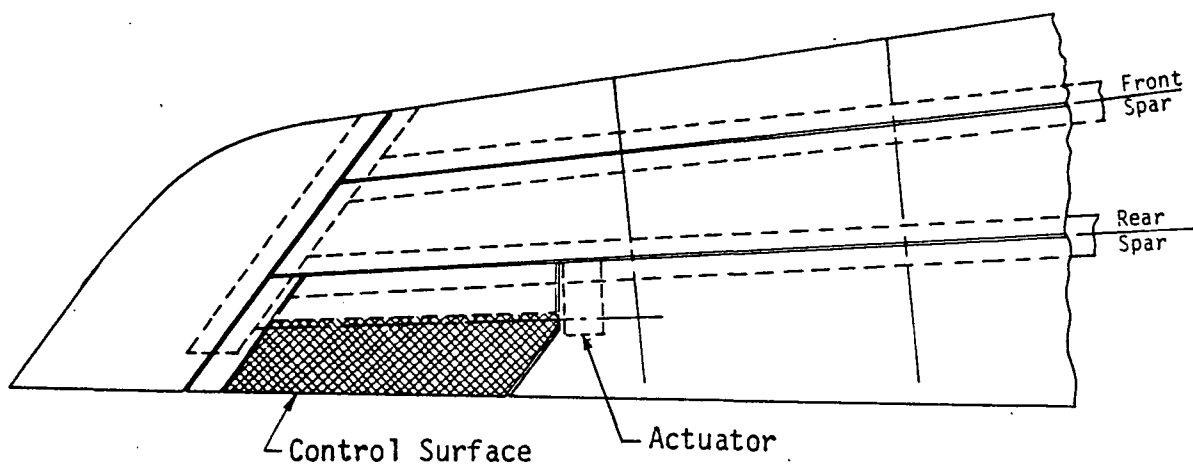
DAST ARW-1 AILERON PLAN VIEW
